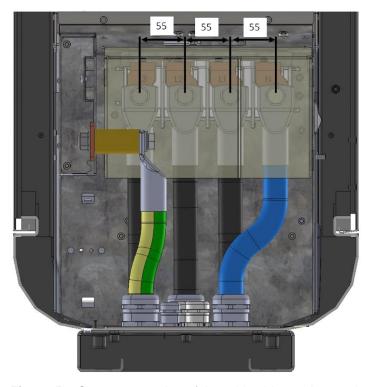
Screw connection of the grid cables to the conductor rails (in mm)
